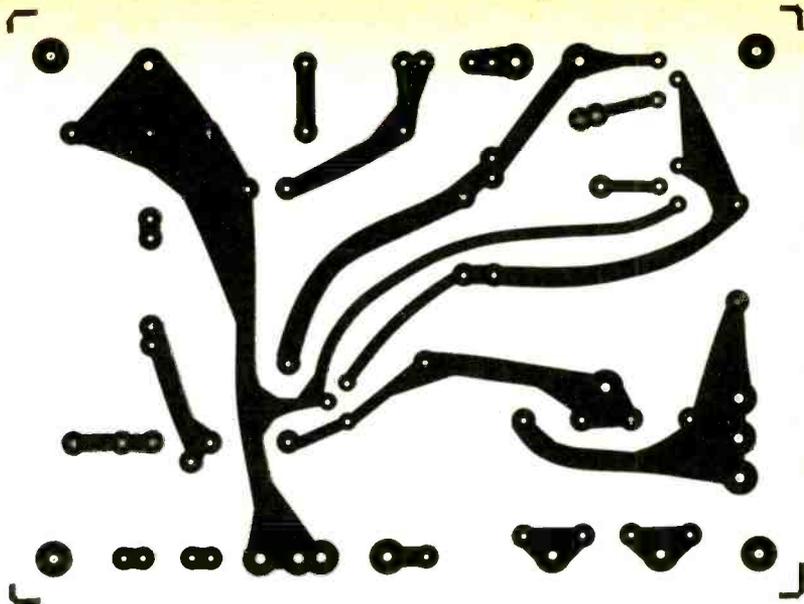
This actual-size printed board can be copied to remove the possibility of wiring errors. The four corner holes are used in mounting the board.
